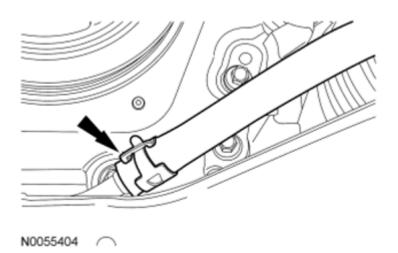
Locating Power Steering Cooler Bracket Bolt Courtesy of FORD MOTOR CO.
